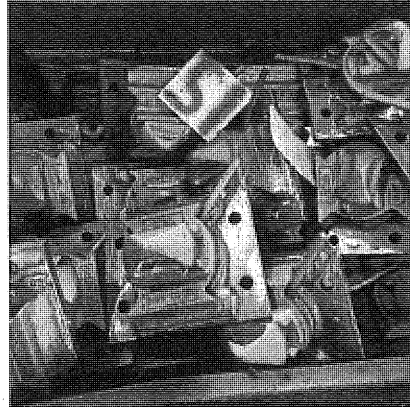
total QTY of Single Twistlocks to be sent for galvanizing
